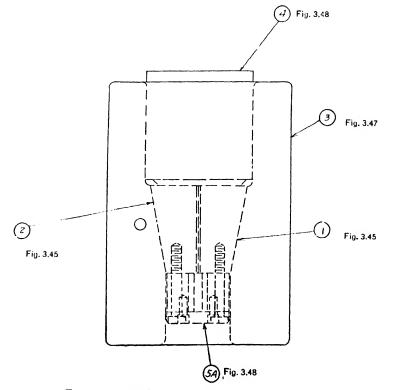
Plasticity-cure time test mold-assembly.
